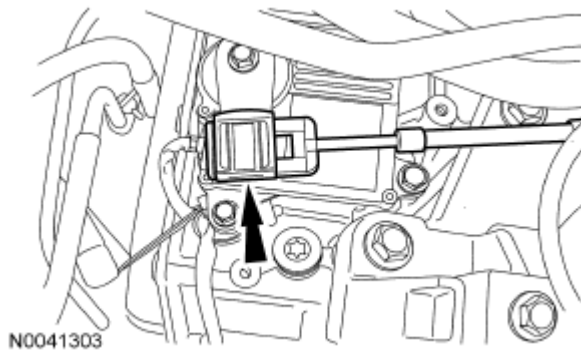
Locating Transaxle Control Cable To Transaxle Selector Lever
